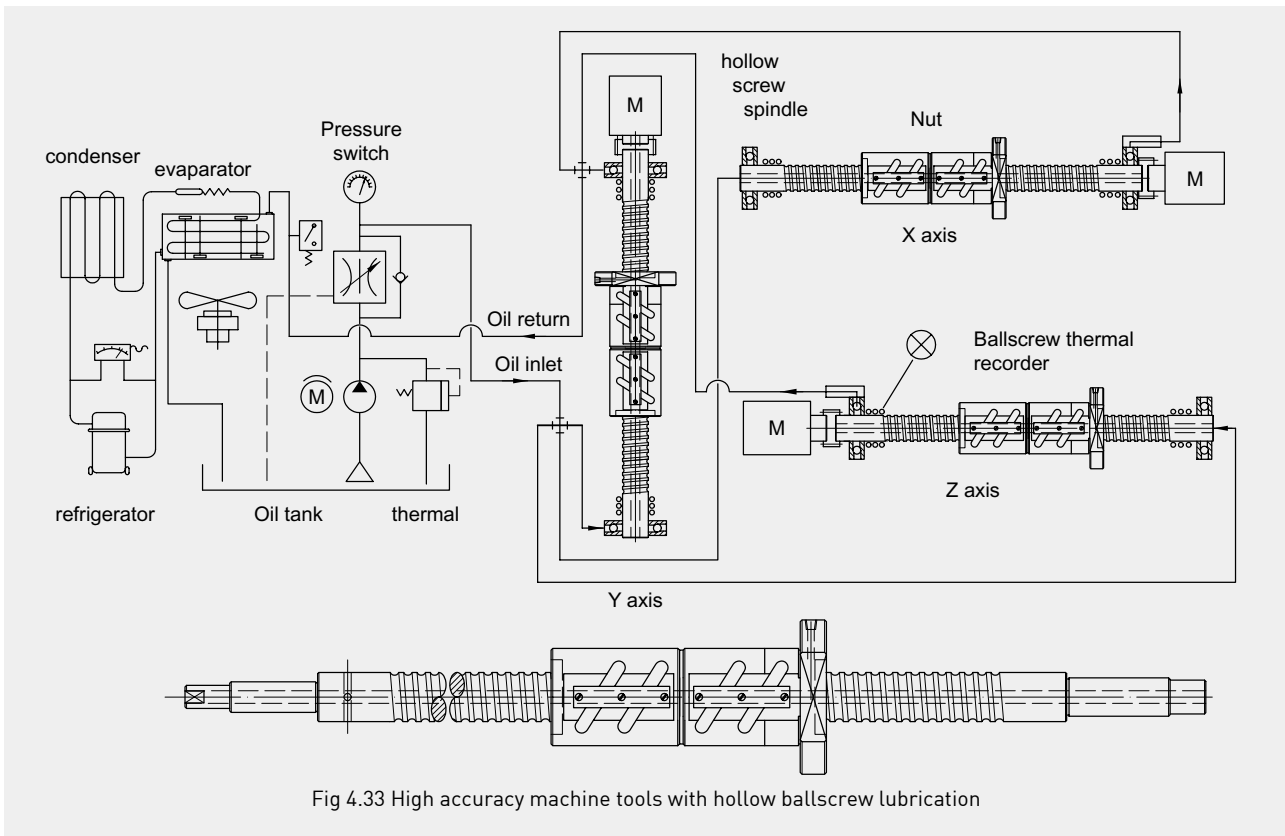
High accuracy machine tools with hollow ballscrew lubrication
